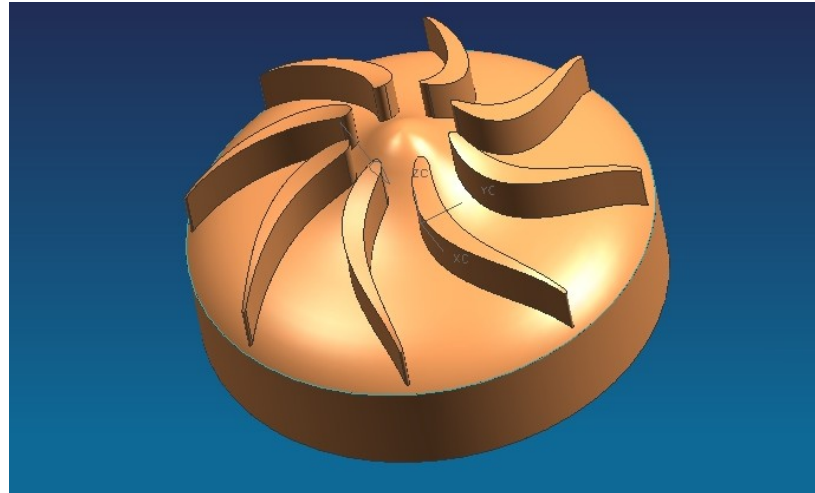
The 3D CAD modeling of the impeller of Model 2
